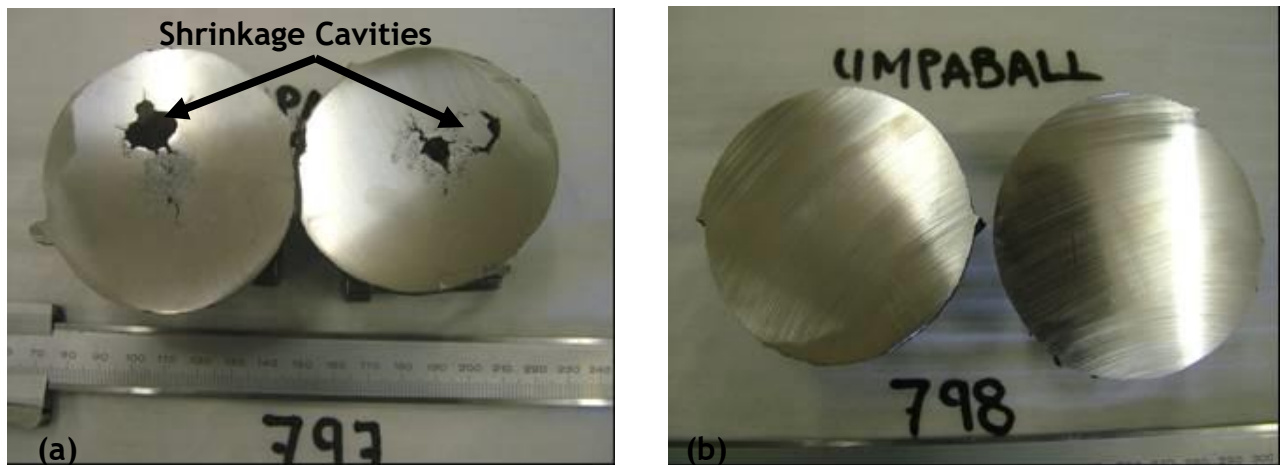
(a) Cross-section of an as cast ball showing shrinkage cavities (b) cross-section of balls with a modified feeding system showing no defects.
